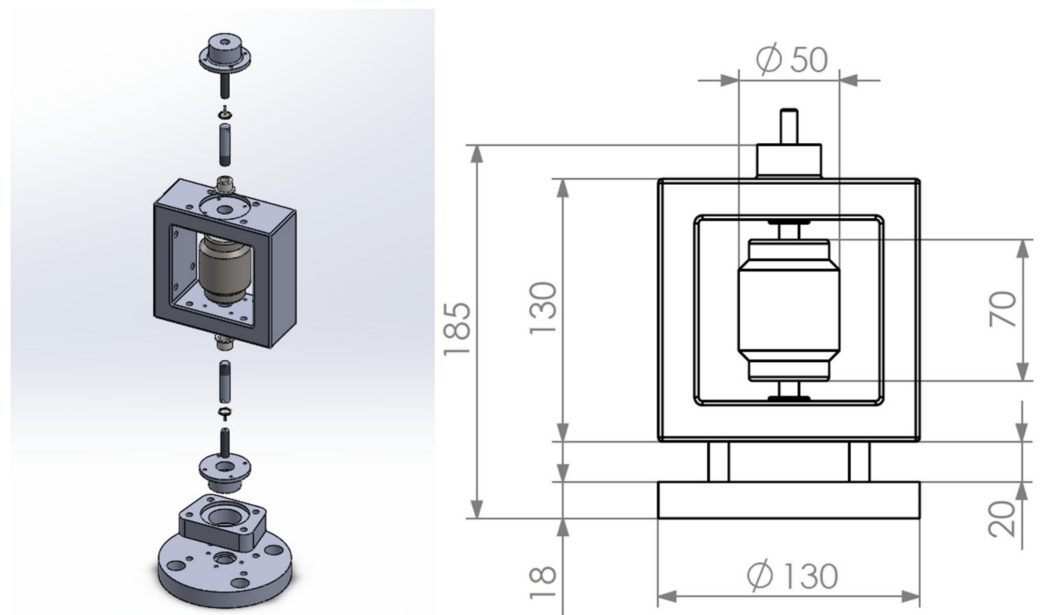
Layout and dimensions of the HW in the z axis configuration test.
